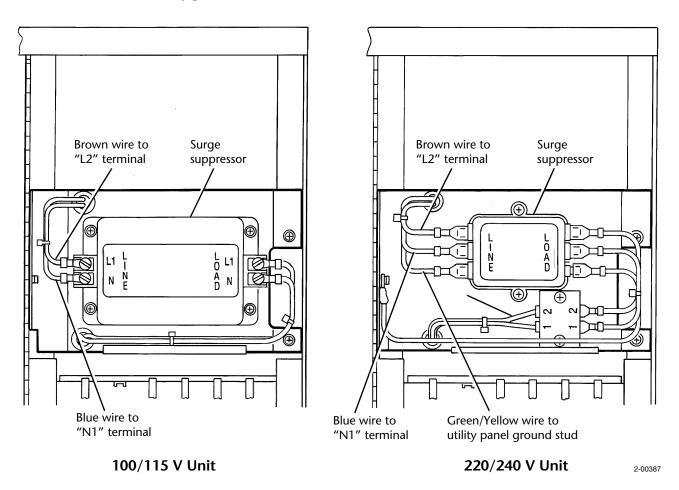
Disconnecting Top-Mounted Surge Suppressor Harness
